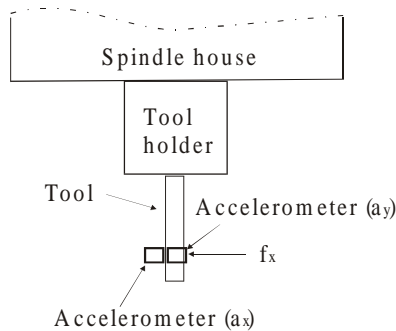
Experimental set-up for the FRF measurement of the tool/tool-holder/spindle assembly
